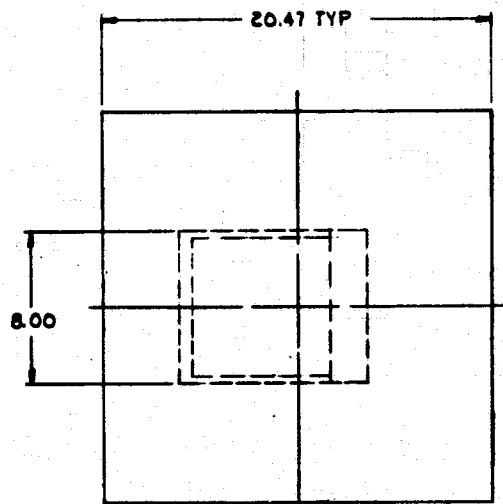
Feed Wheel Drawing (Sheet 1 of 2)
